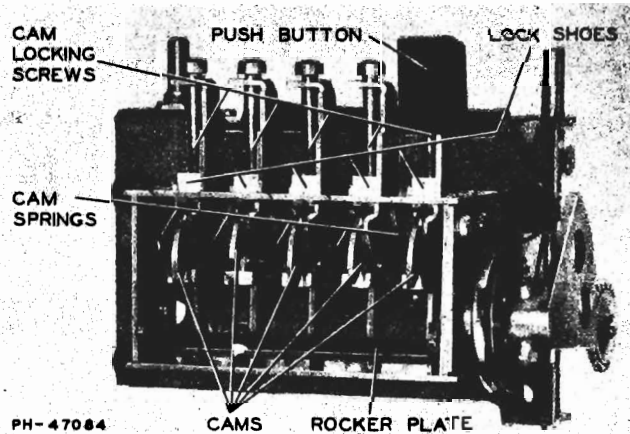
BOTTOM VIEW OF PUSH BUTTON MECHANISM
